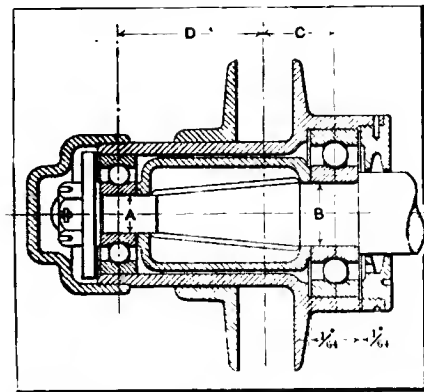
Hess-Bright type of hub with annular type ball bearings and safety spacer which serves as a preventer bearing
